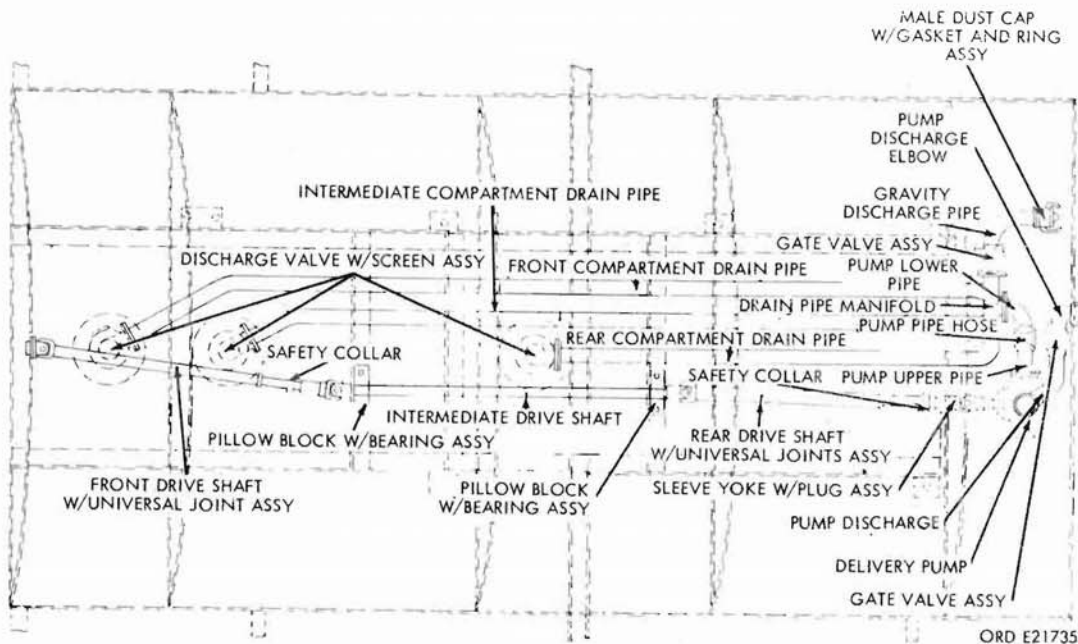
Fuel tank body drainpipes, pump drive shafts and pillow block assemblies
